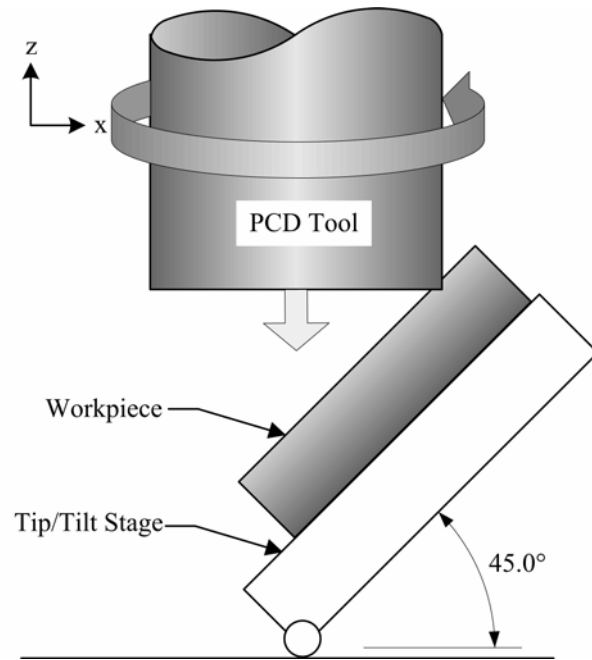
Diagram of PCD edge method for machining vee-shaped grooves
